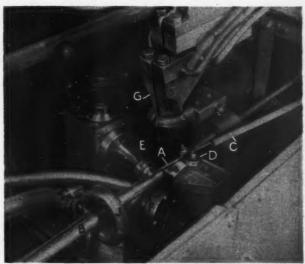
Thermatool high-frequency resistance welder and draw bench for welding spiral or parallel fins to the surfaces of tubes
